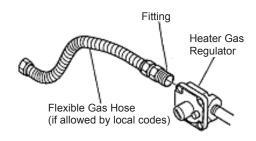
Attaching Flexible Gas Hose to Heater Gas Regulator
